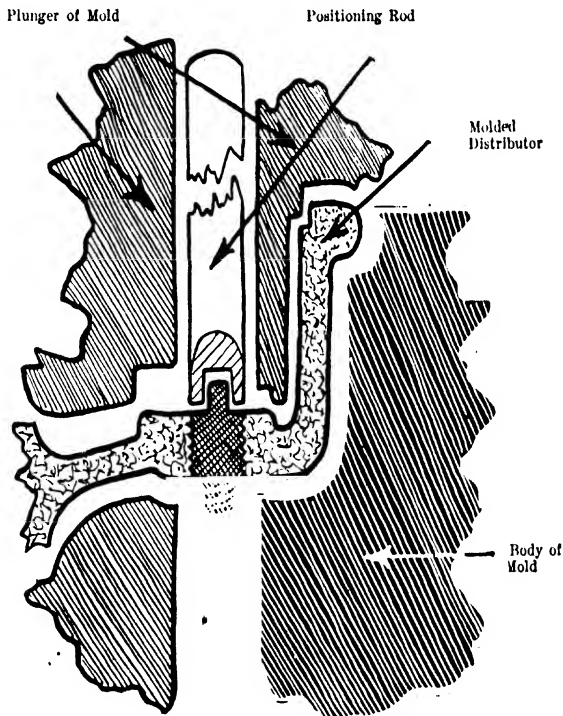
Diagram Showing One Method of Anchoring Inserts in Mold During Pressing. (*Clearance exaggerated.*)
